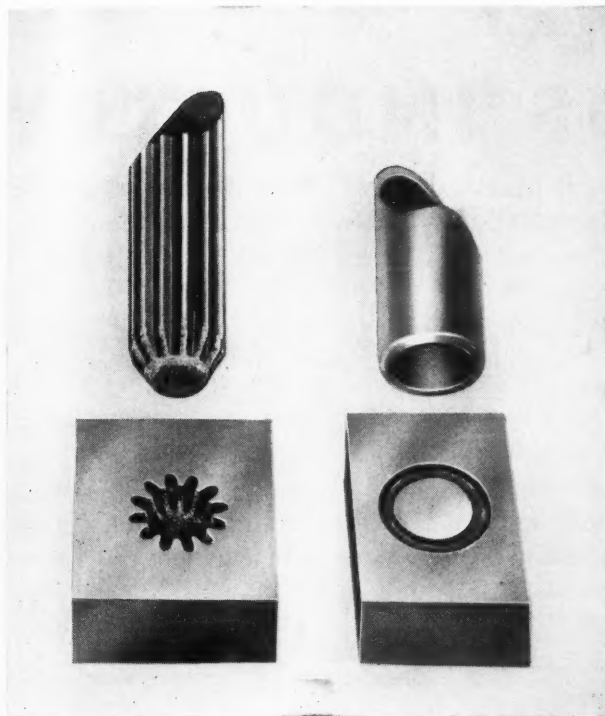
Gear (lower left) and ring compacting-die (right) sections produced directly in solid sintered carbide by Method X. The spline-shaped electrode (upper left) is made of brass
